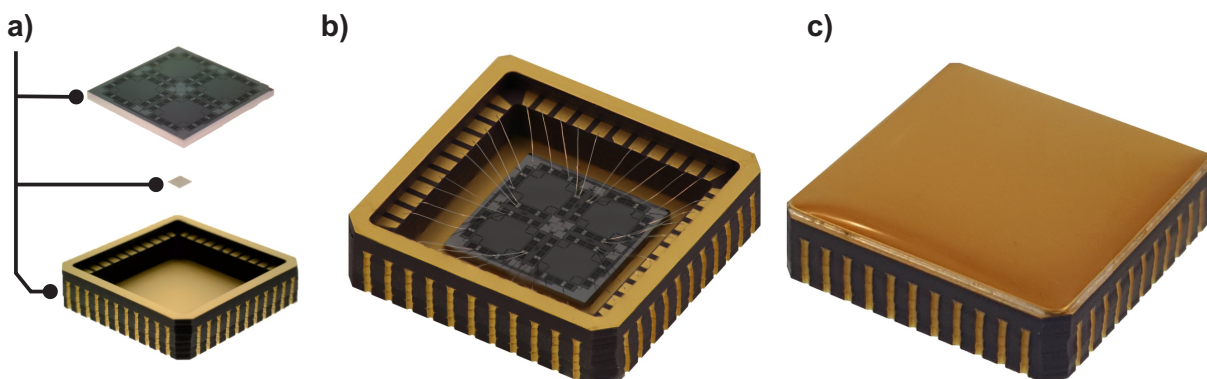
Exploded view of vacuum sealed with an activated getter material in the LCC package for SOI MEMS Quad Mass Gyroscope (QMG). a) including 8.6 mm footprint die, die attachment solder preform, LCC package, b) die attached and wire bonded, c) vacuum sealed used as test structure.
